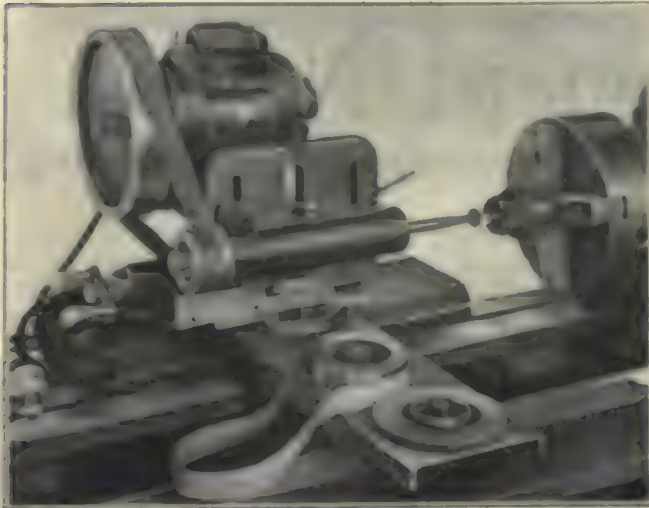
"ELEC DRIVE" PORTABLE SCREW AND NUT SETTING TOOL
